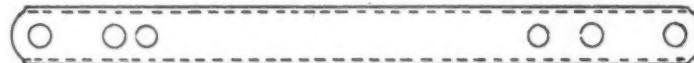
Unsymmetrical parts should be nested and symmetrical parts handled.
